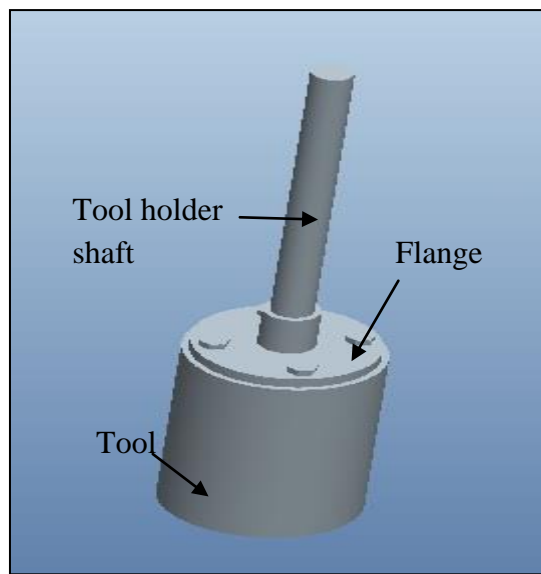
Coupling arrangement of the tool holder shaft and the tool
